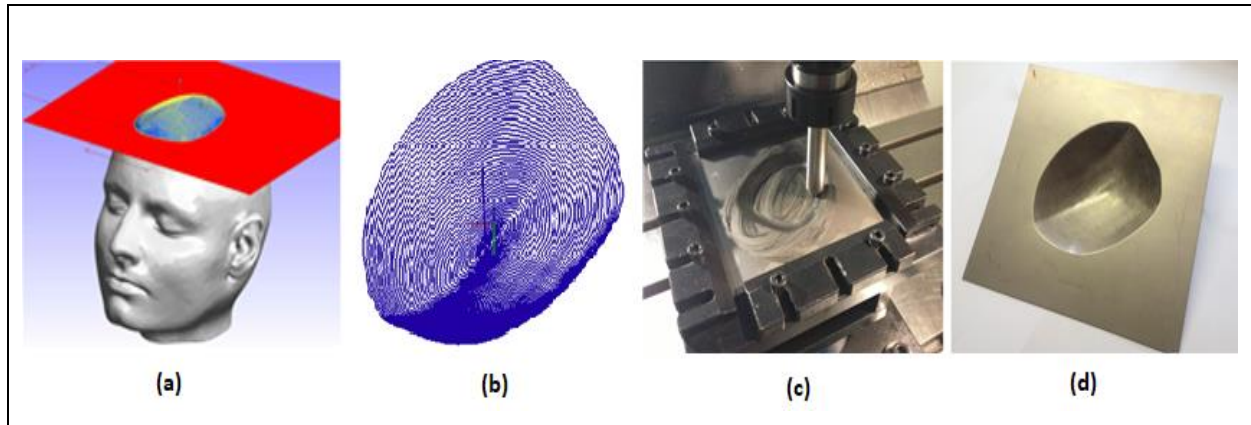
(a) Head model (b)Tool path for cranial plate (c)SPIF setup for forming (d) Finished[21].
